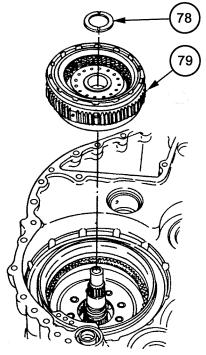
Fourth and Reverse Clutch Assembly. (Repeated)
